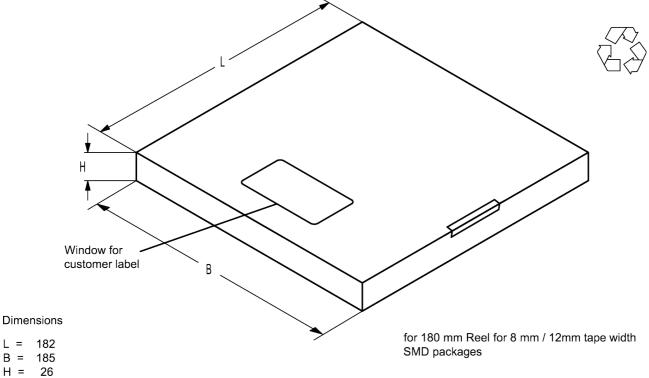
Drawing of folding box for reel with diameter of 180 mm.
